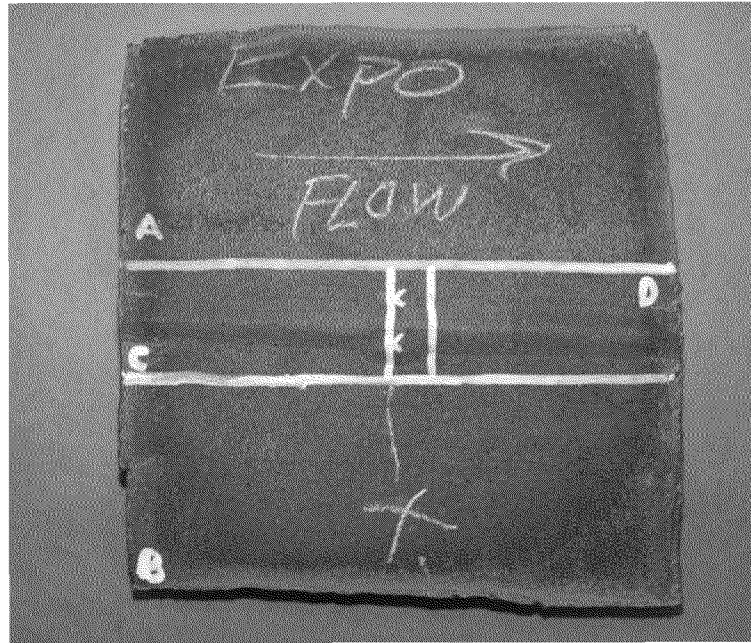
Window that contains specimen marking and the two OD “button” welds.
